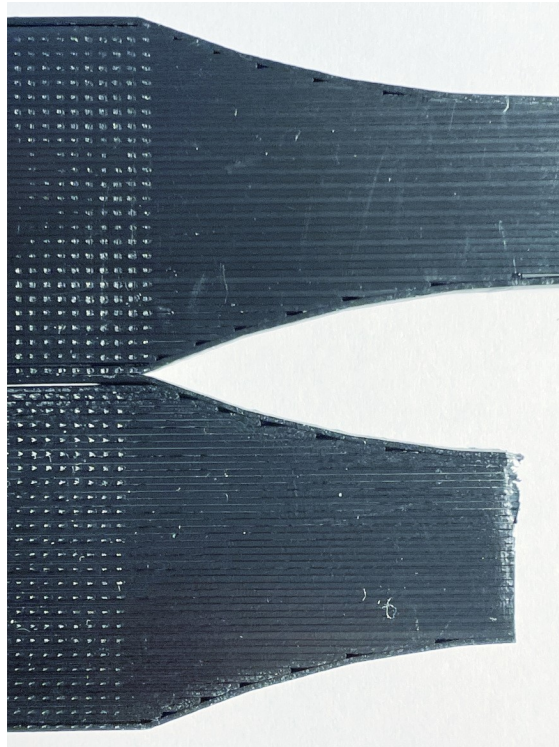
Magnified view of printing defects in a dog-bone specimen for direction 1.
